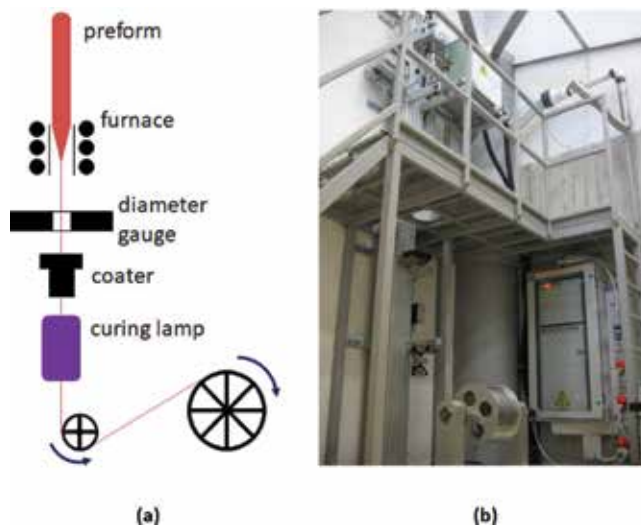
(a) Schematic illustration of a fiber drawing tower, which implements the preform drawing approach; (b) photography of an in-house developed drawing tower installed at Politecnico di Torino.
